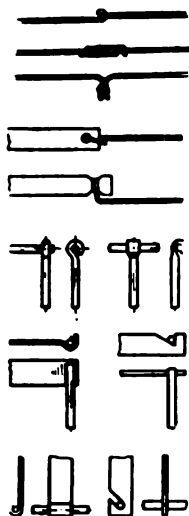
Examples of soldered joints for the case when both or one of the parts to be soldered is made of wire or of rods
